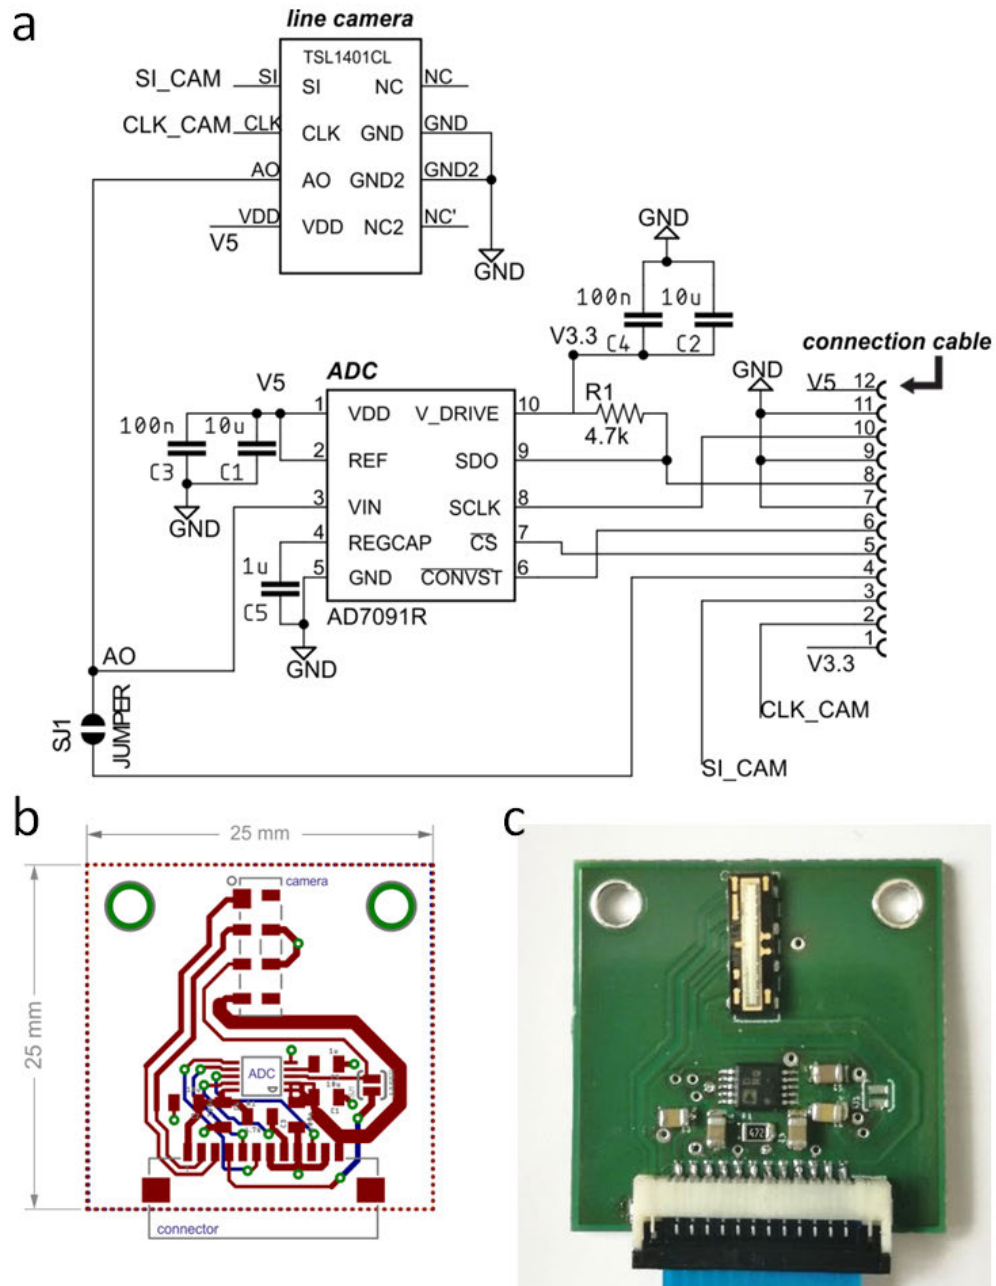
(a) Electrical circuit of the camera board carrying the line camera and the ADC. (b) Layout of the camera board. (c) Picture of the PCB after soldering all components
